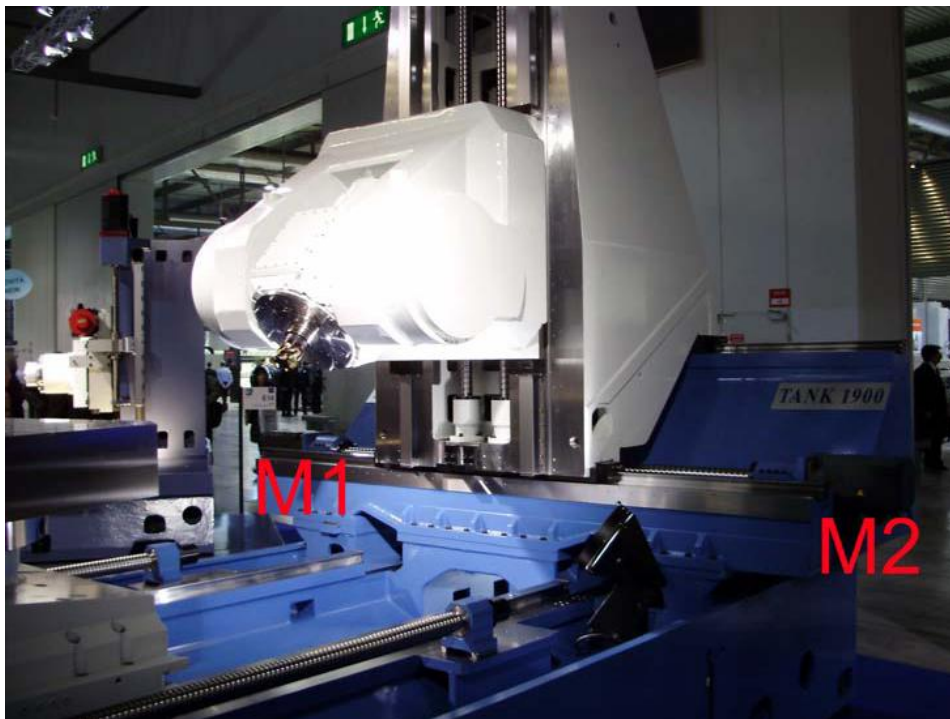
Machine tool with 2 PMSMs by MCM [6]
